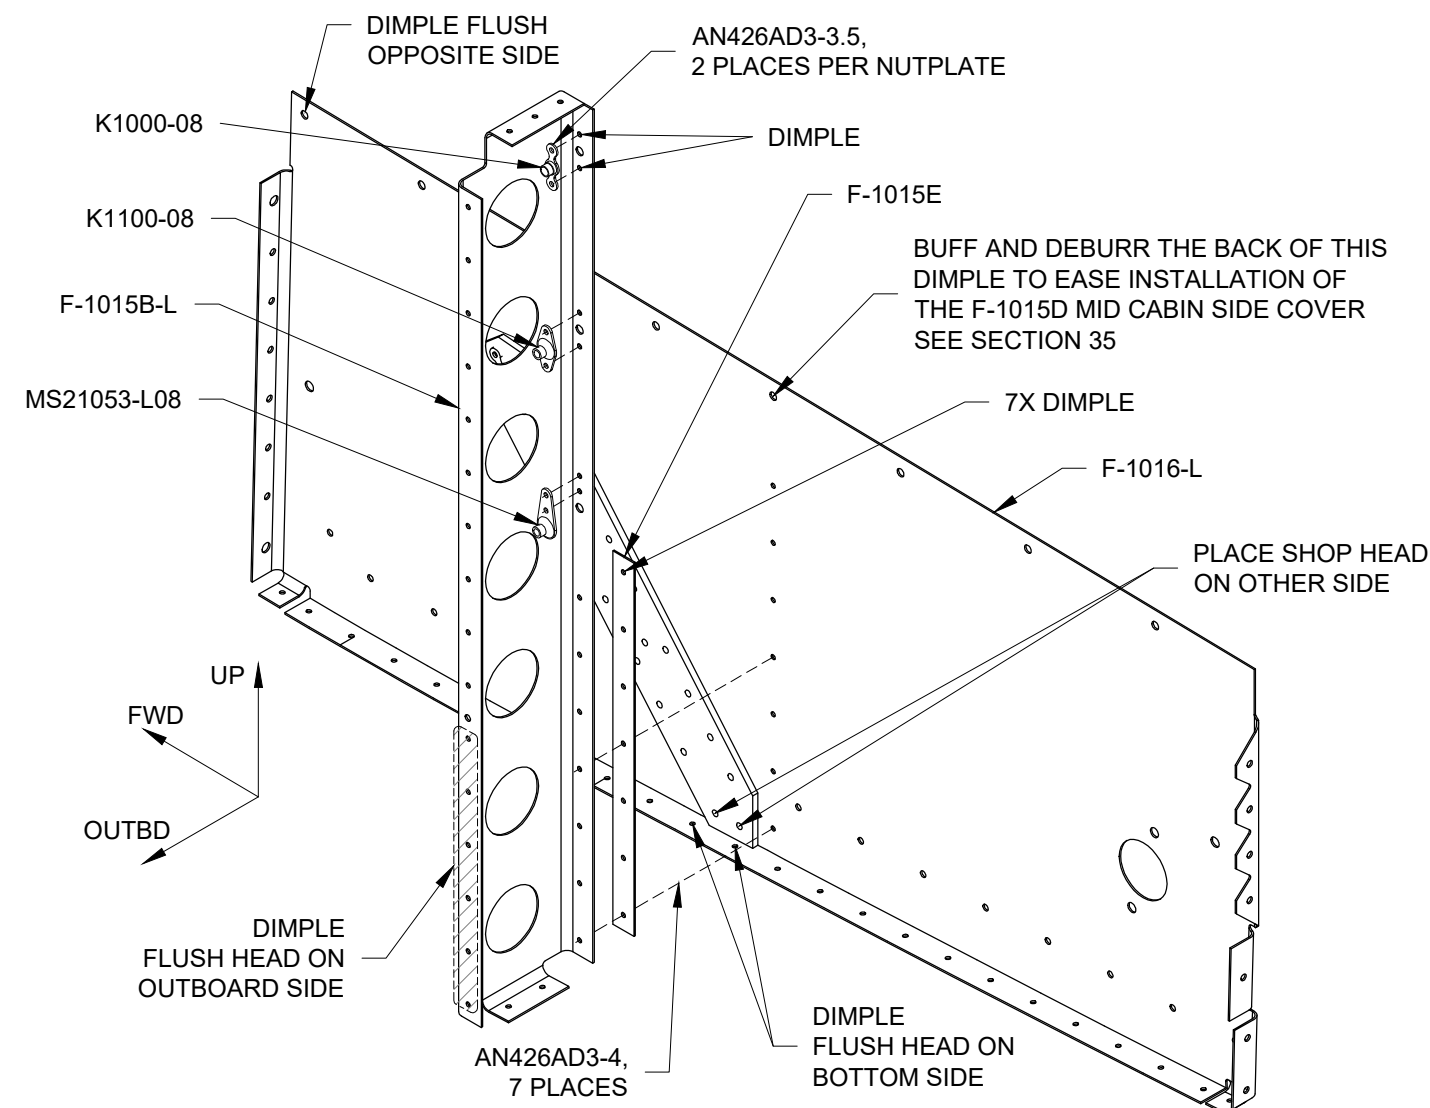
LEFT OUTBOARD SEAT RIB SUBASSEMBLY
